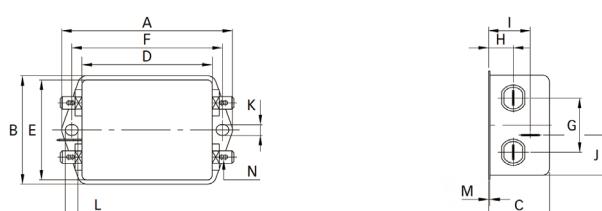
Dimension drawing of FN 2090 series filters (unit: mm)
